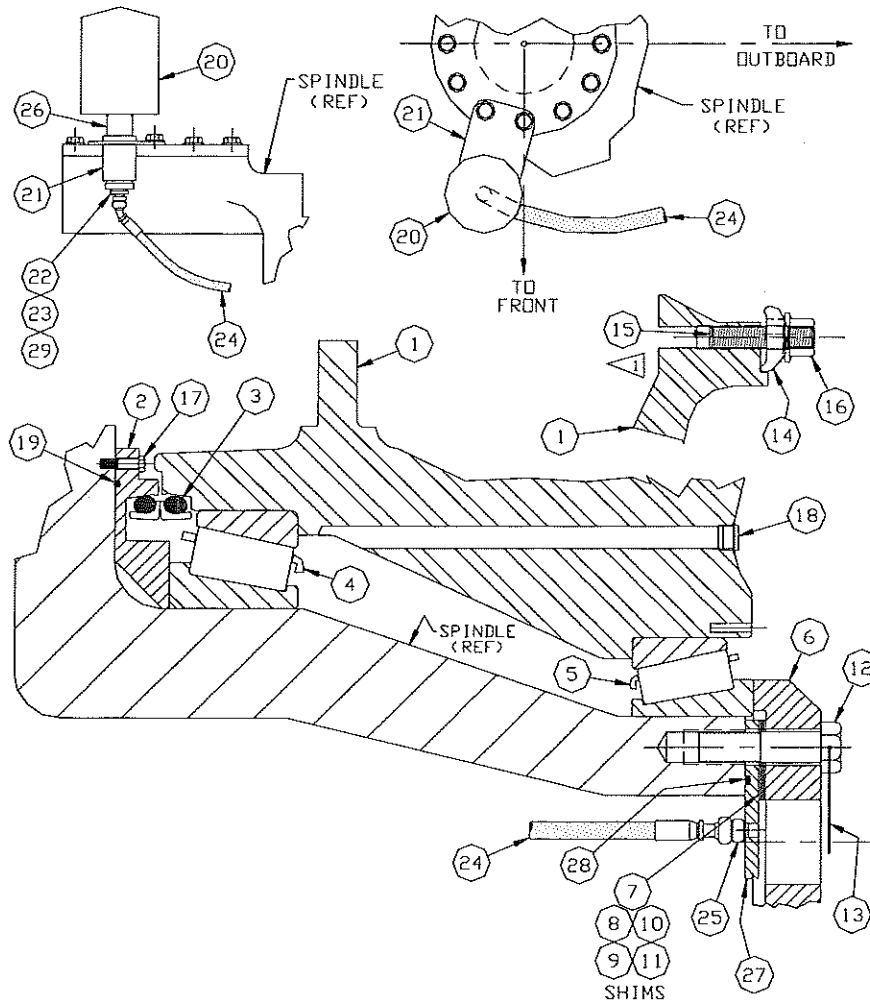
B - FRONT WHEEL ASSEMBLY – VENTED WITH FILTER
